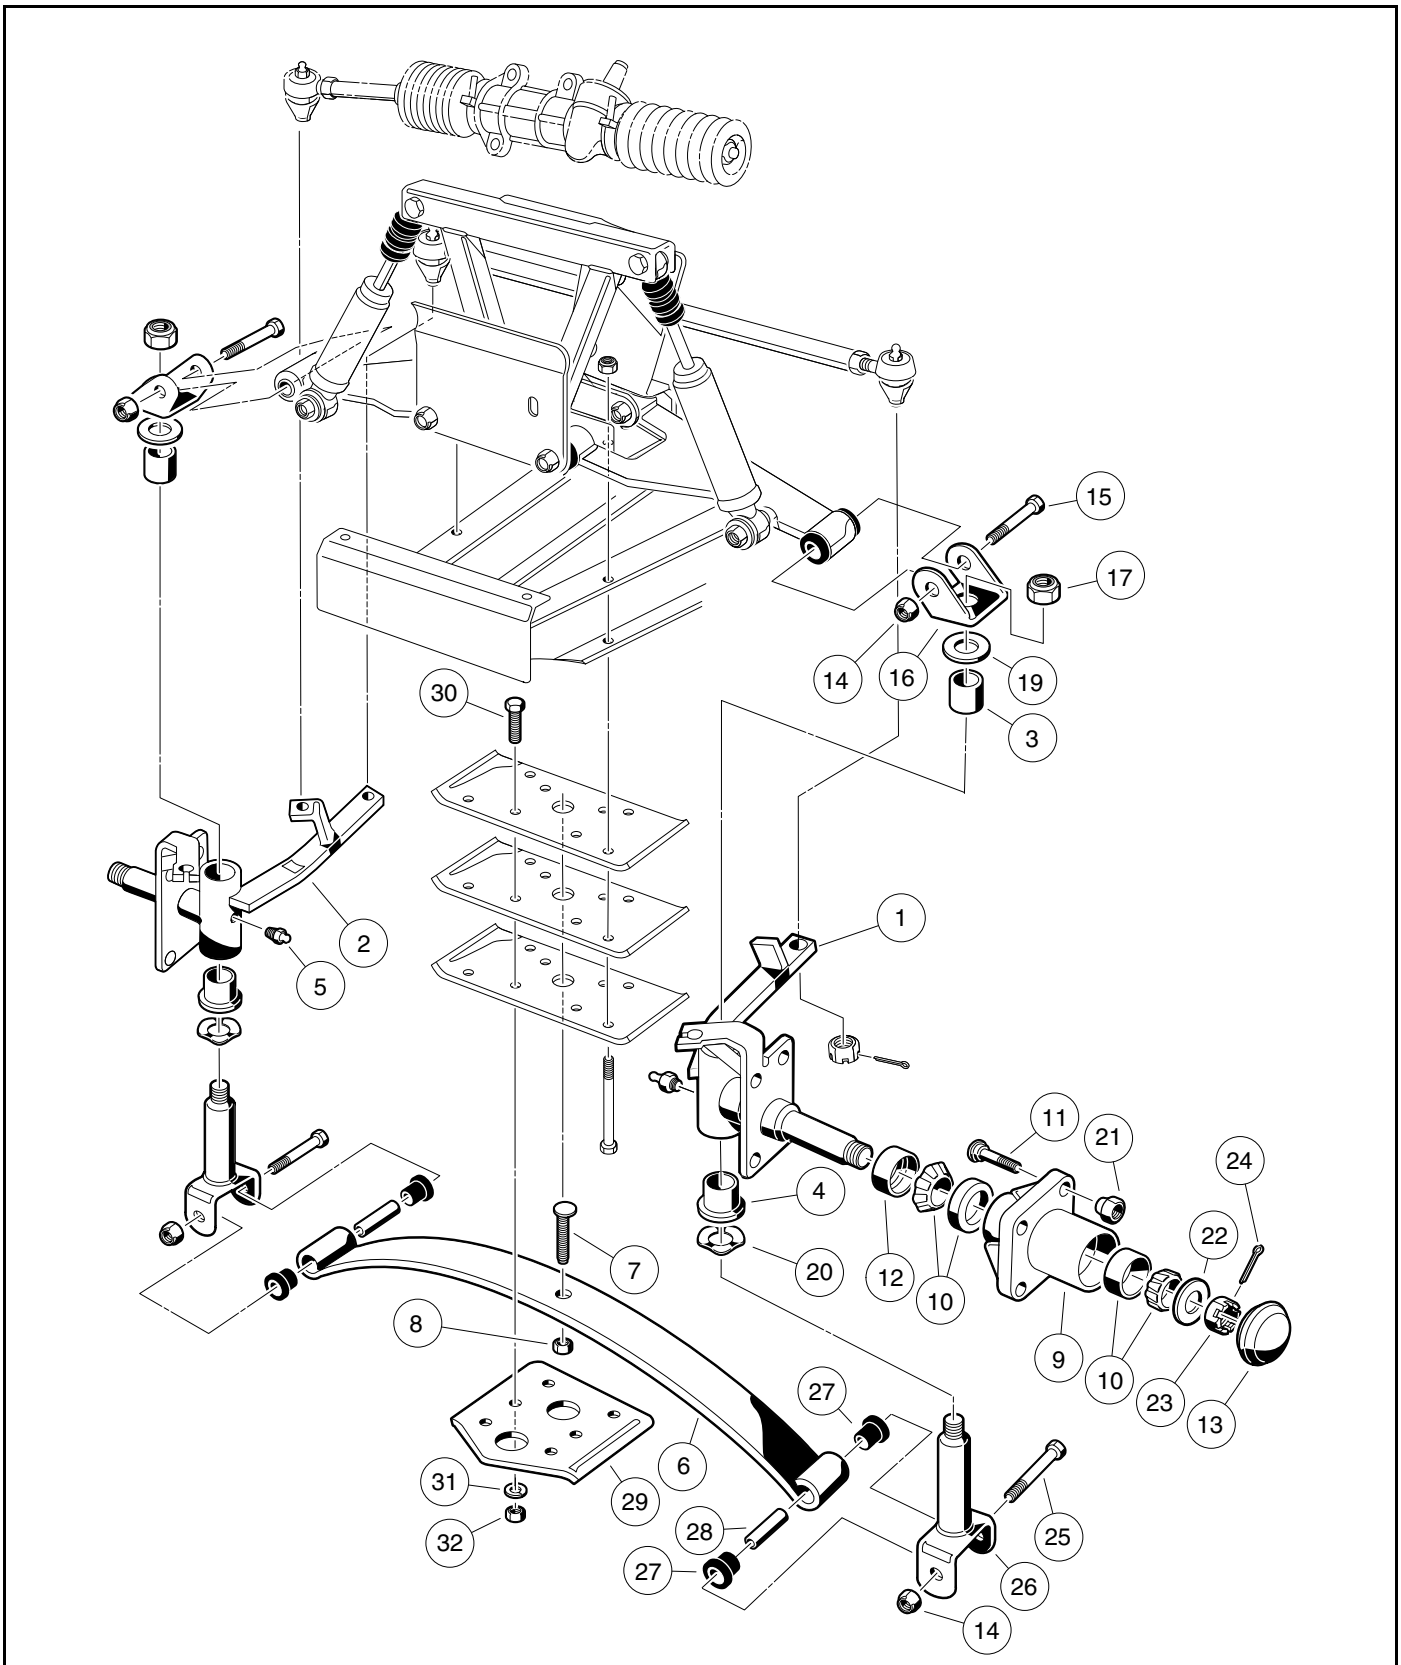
Four-Wheel Brake Vehicle – Lower Portion
